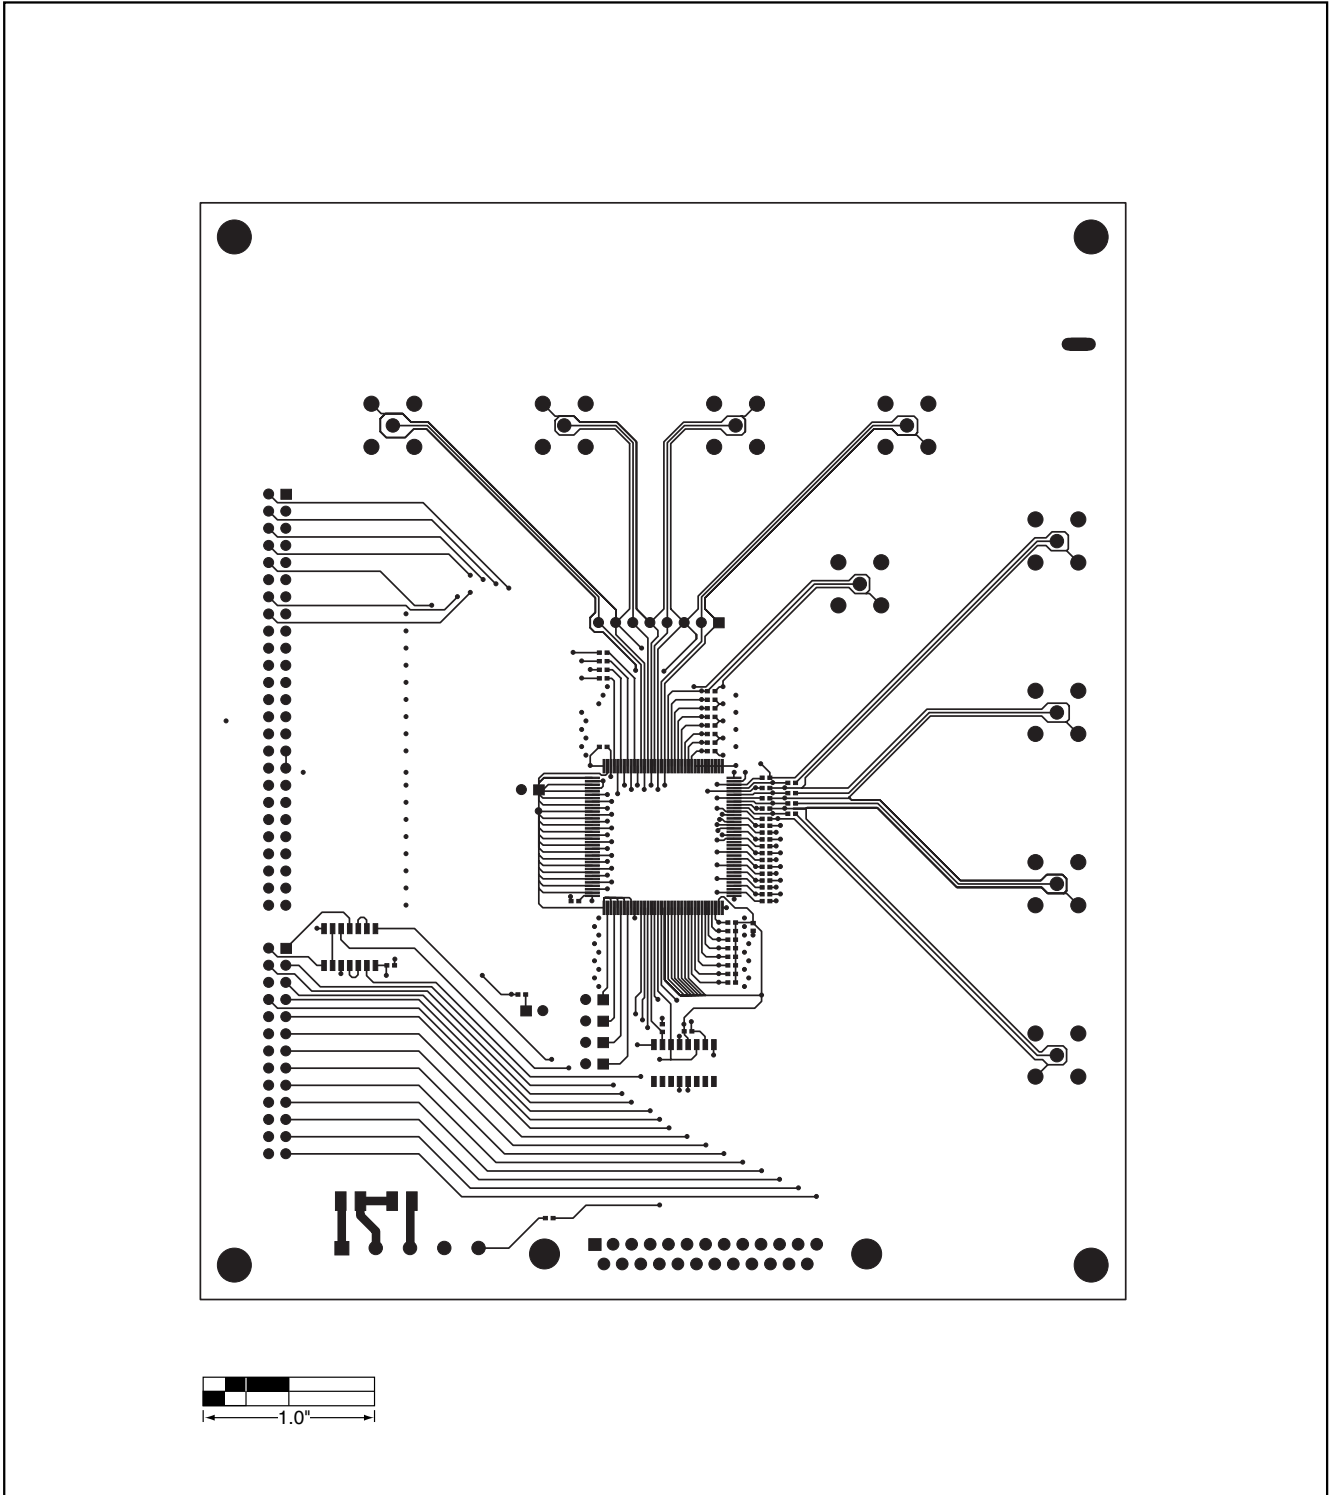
MAX4358 EV Kit PC Board Layout—Layer 1
